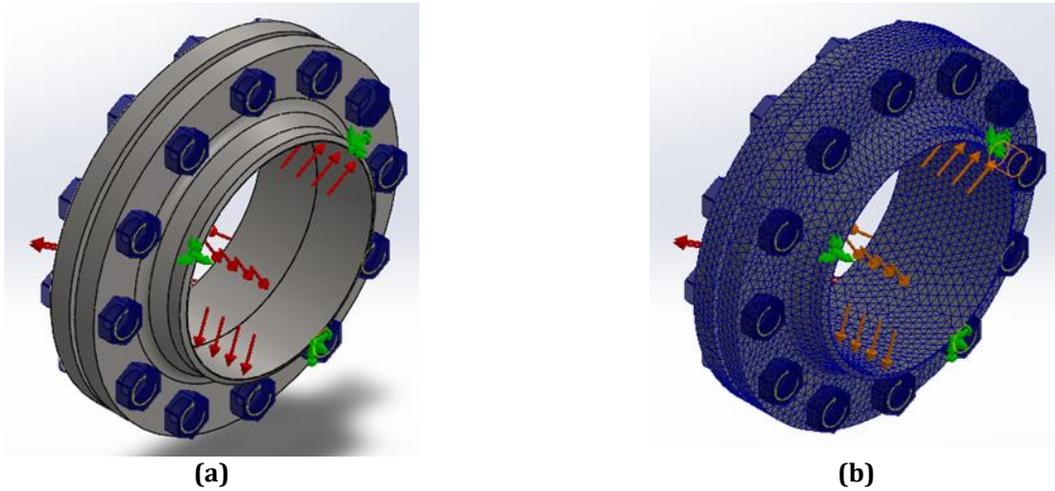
(a) Full Boundary Conditions of Flange Coupling; (b) Meshed Flanges
